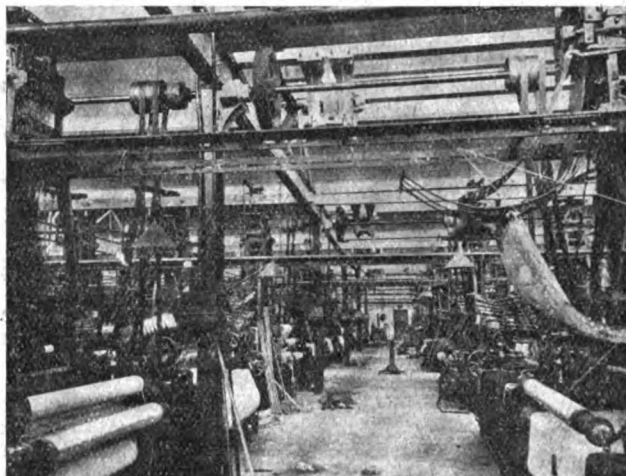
VIEW IN WEAVING SHED, SHOWING MOTOR-STARTERS, SUSPENSION OF DRIVING MOTORS, AND GEARING (GEAR CASES REMOVED).
